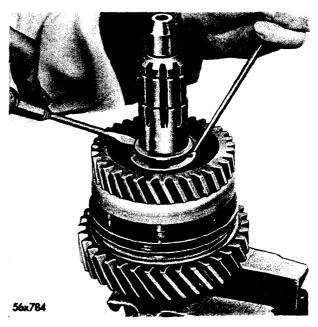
Removing 3rd Speed Gear Lock Ring
